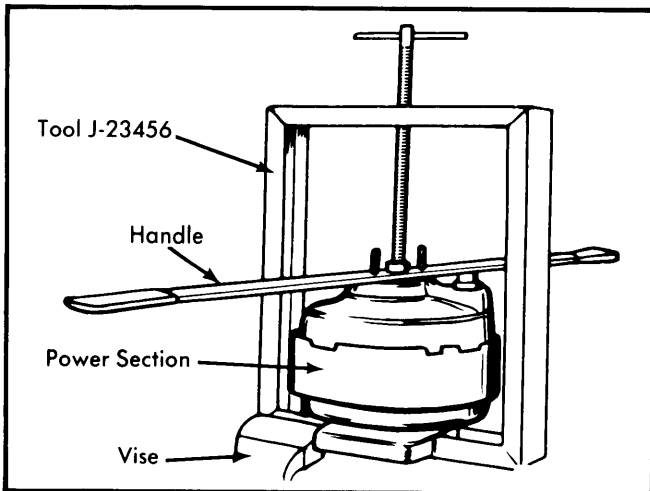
Using Special Tools to Separate Front & Rear Housing
